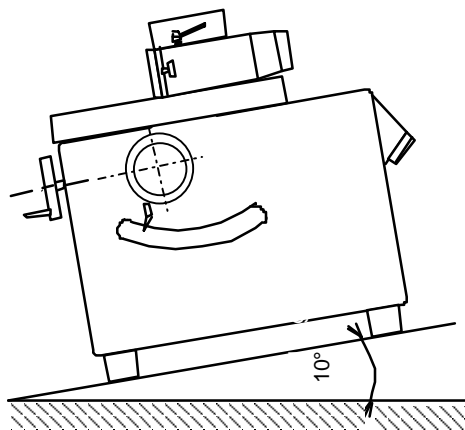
Example of testing the stability of a single spindle vertical moulding machine (side view)
